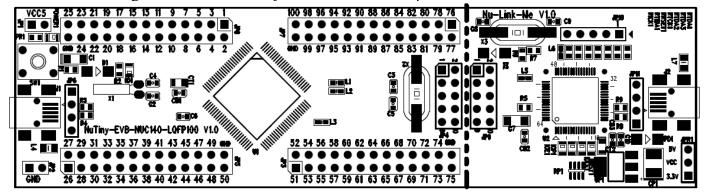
NuTiny-SDK-NUC140 PCB Placement
